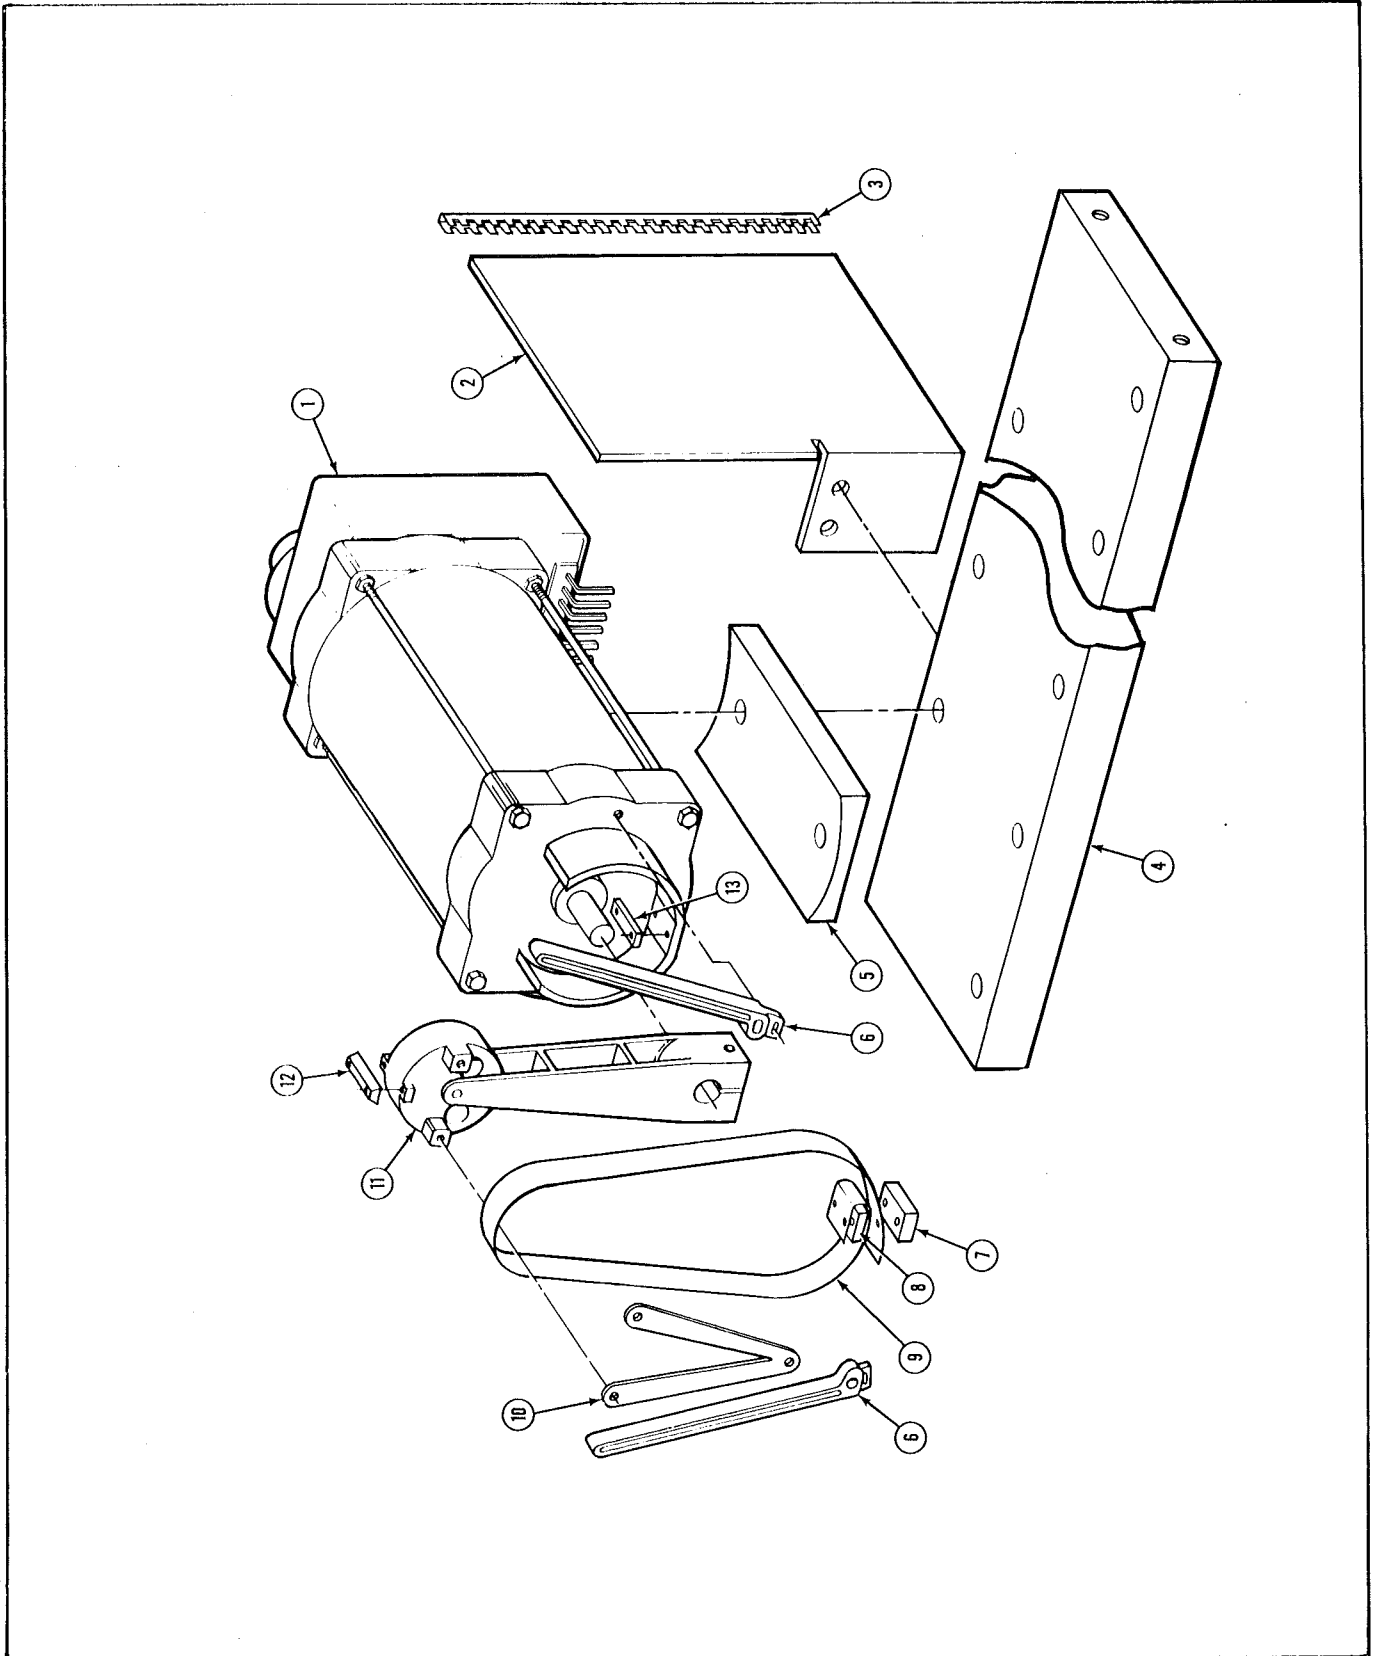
BAR ASSEMBLY, PENMOTOR
